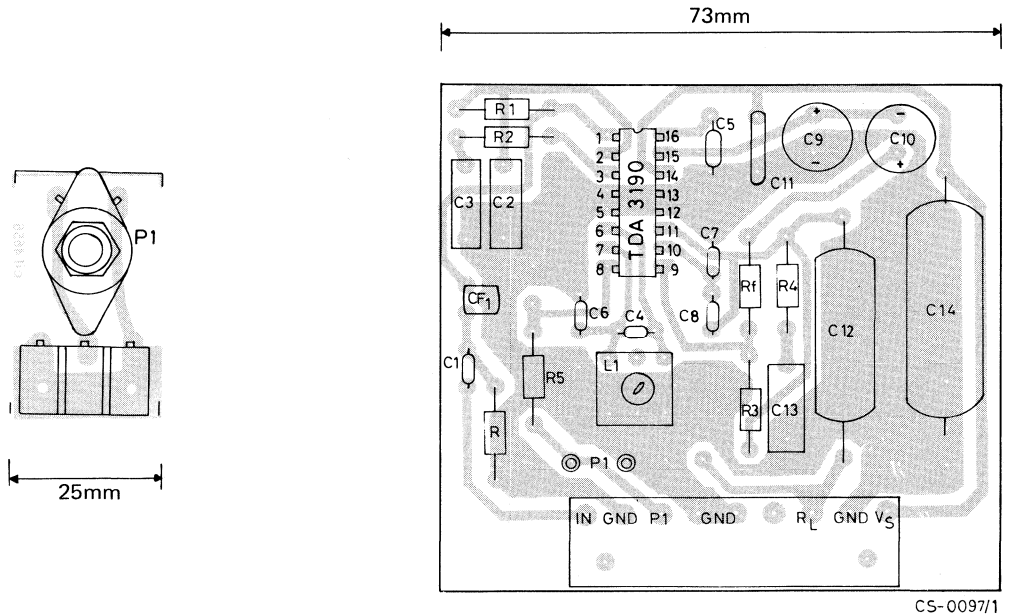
P.C. board and component layout of the circuit shown in Fig. 16 (1:1 scale)
